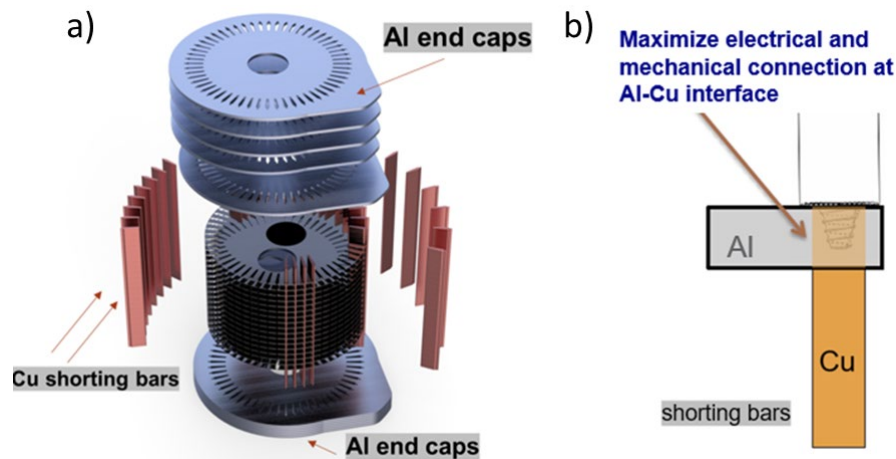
Schematic of the (a) AlCu hybrid rotor, and (b) joining of Al to grooved Cu shorting bar.
